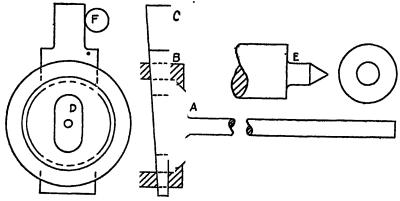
DRIVER FOR GRINDING AUTOMOBILE VALVES
